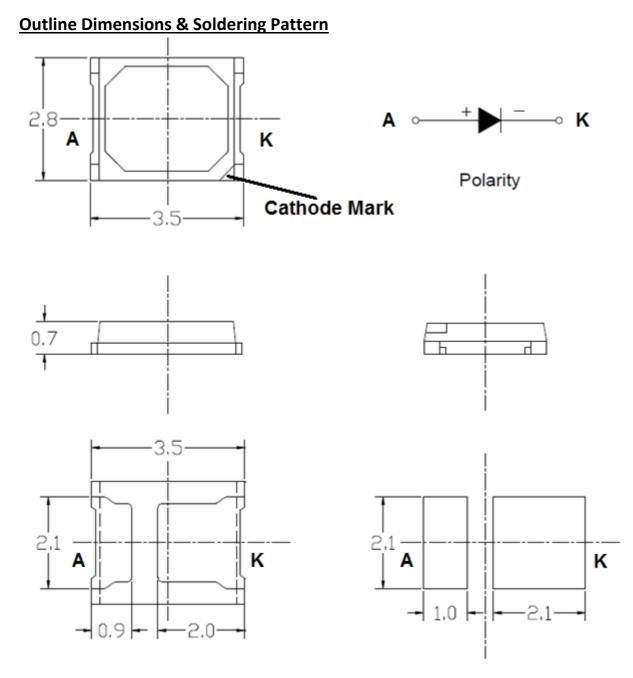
Mechanical Drawing & Soldering Pattern of the 2835 package
